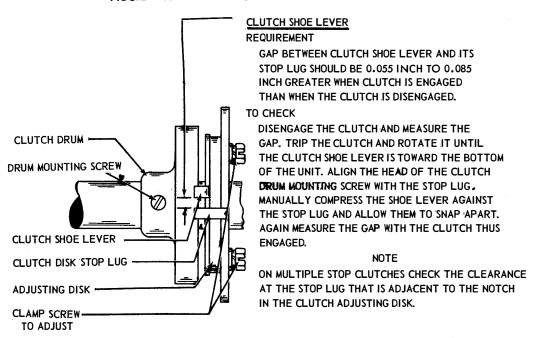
TYPING UNIT, TYPE BOX CLUTCH MECHANISM
